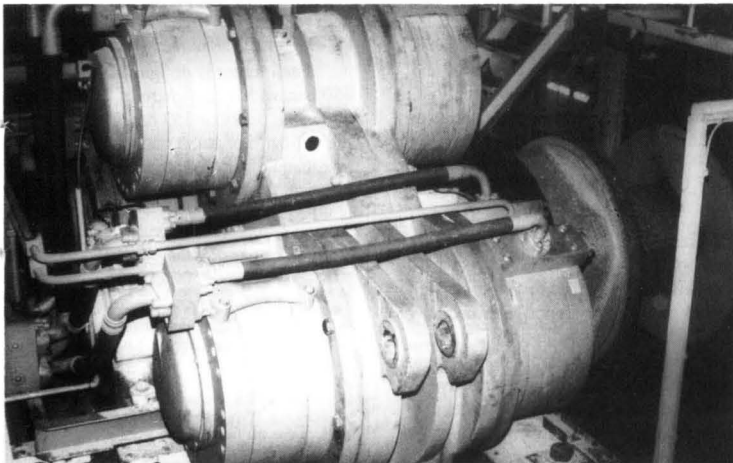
Gear box showing four of the six Hydrex motors mounted on the casing. To the right may be seen the coupling boxes and tail bar
